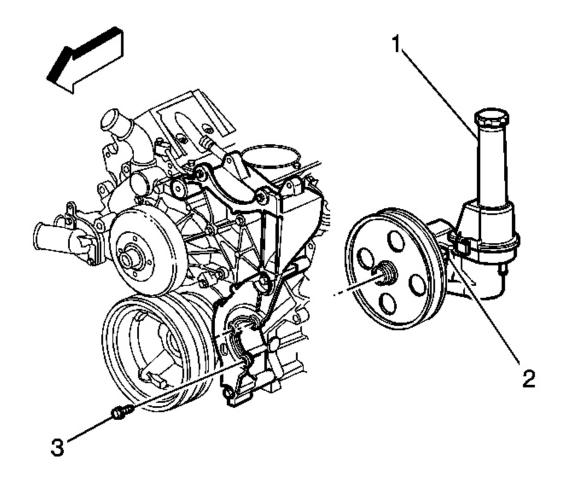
Removing/Installing Power Steering Pump Courtesy of GENERAL MOTORS CORP.
